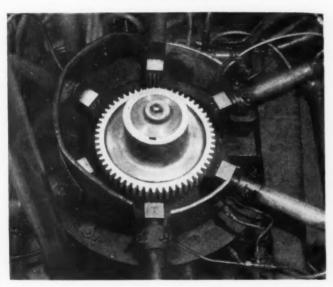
TYPICAL SETUP FOR FLAME-HARDENING A 4-PITCH GEAR
